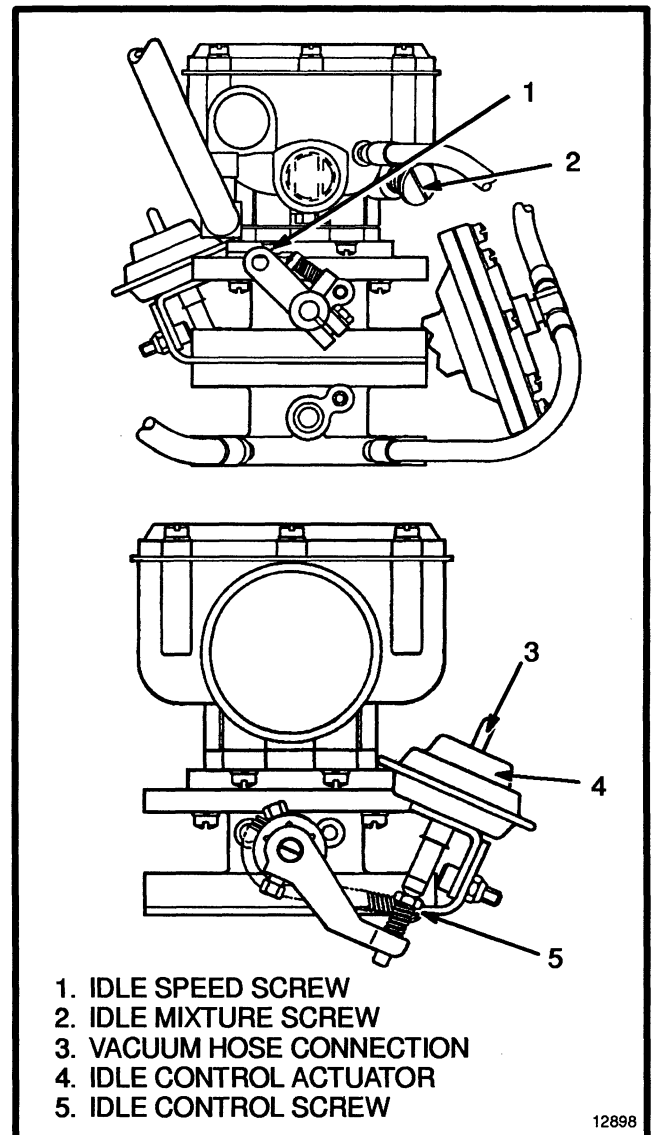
CARBURETOR ADJUSTMENTS, 3.0L ENGINE
